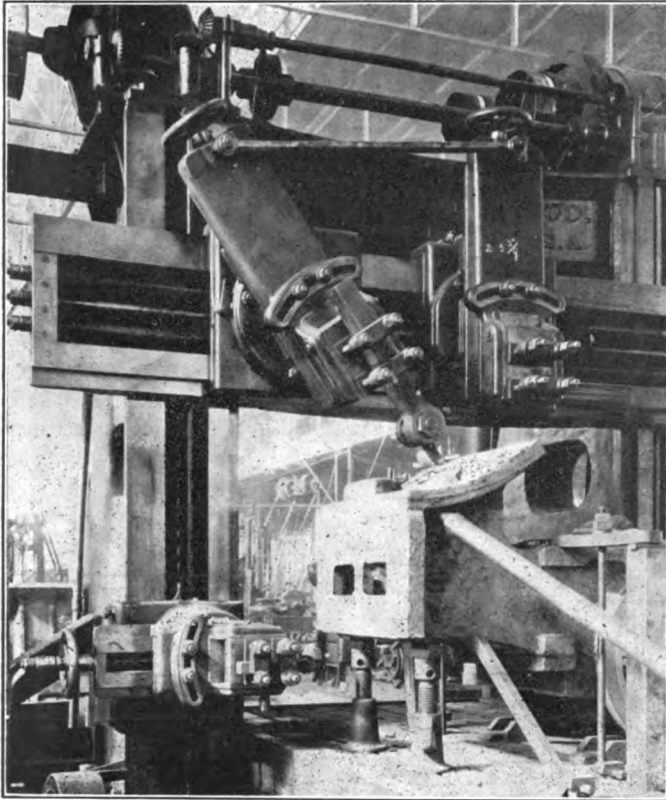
Radius Attachment for Planing Cylinder Saddles.
